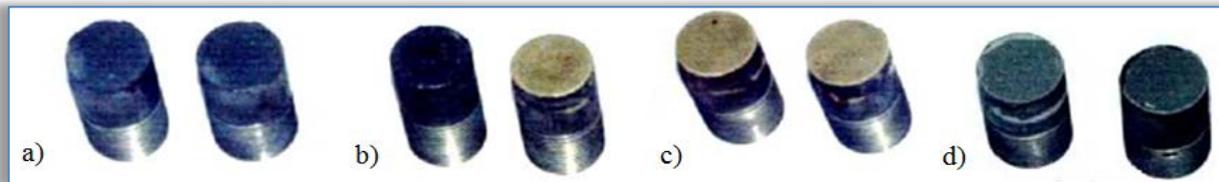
Undesirable possible fracture locations: a) through the bond coating, b) at the bond coating / ceramic coating interface c) through the ceramic coating and d) at the ceramic coating / glue interface [3].
